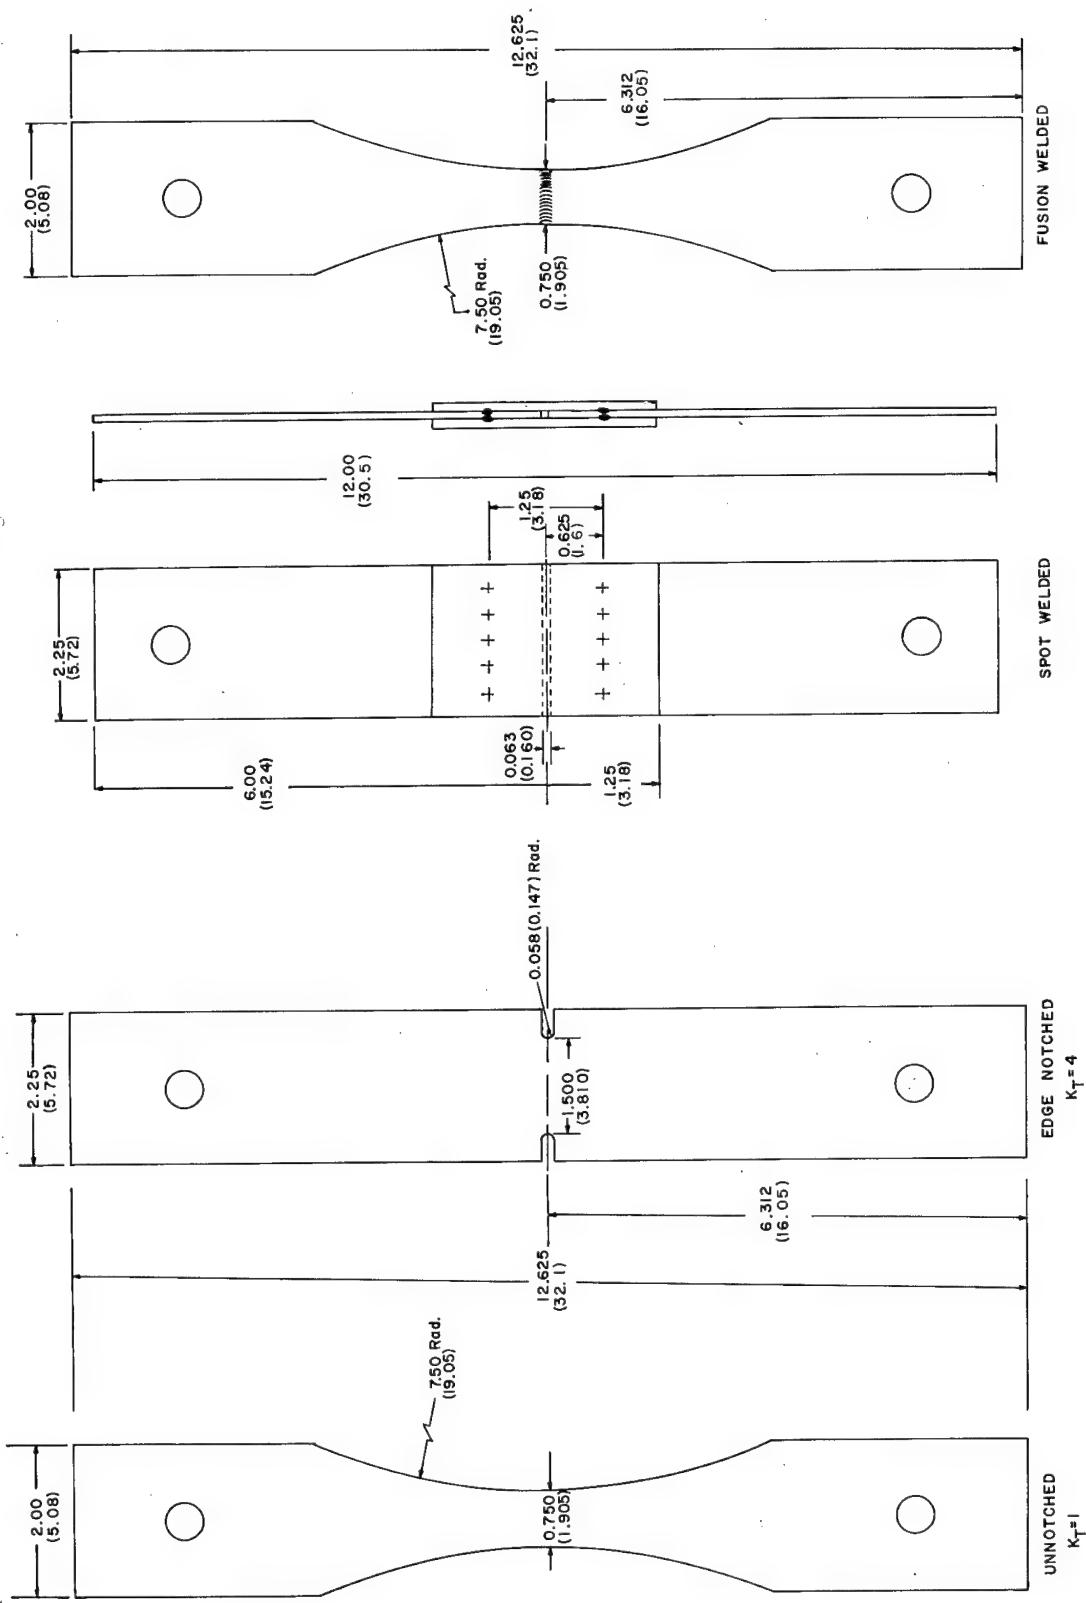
Fatigue specimens. All dimensions are in inches (centimeters).
